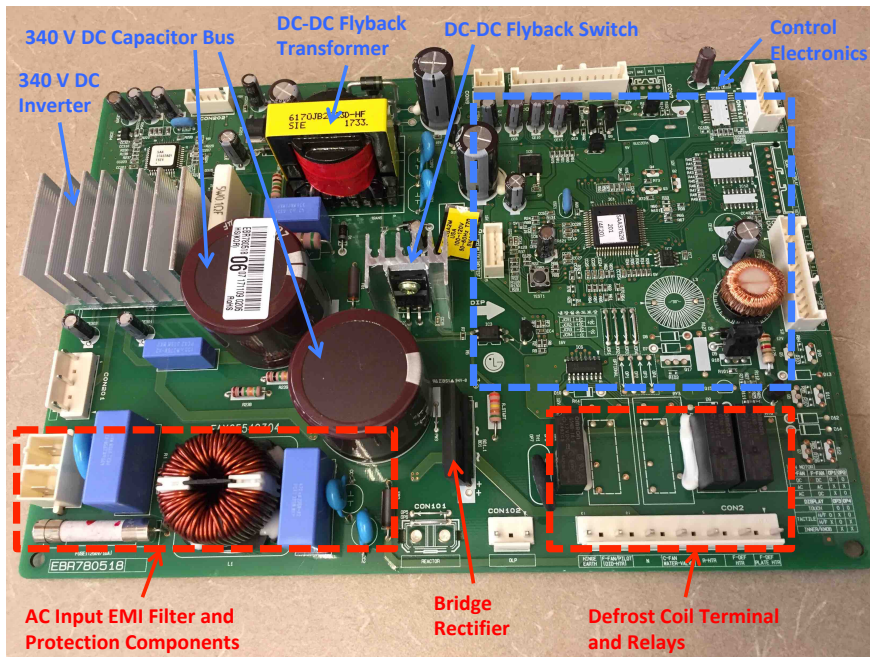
Inverter board for the LG LTNC11121V refrigerator. The inverter is a high-voltage 3-phase SIM6822M chip. The board dimensions are 23 x 16 cm.
